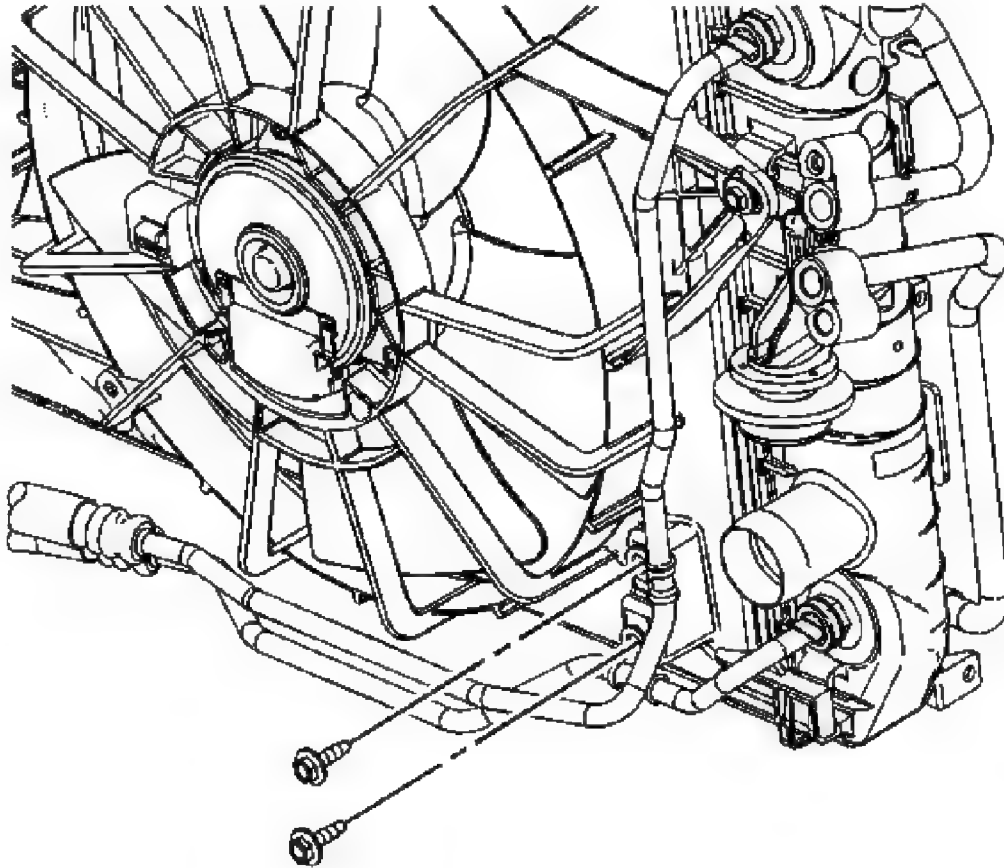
Identifying Transmission Oil Cooler Pipe Retaining Bolts
